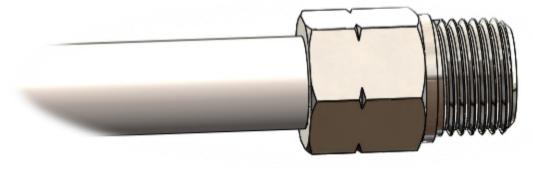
shows the arrangement of 8mm super tube to the adapter.
